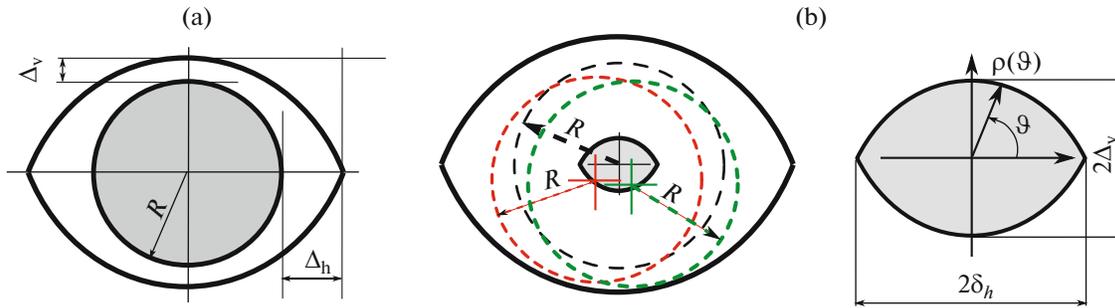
(a) Horizontal and vertical clearances of the elliptical bearing and (b) construction of the DPM of the shaft journal center.
